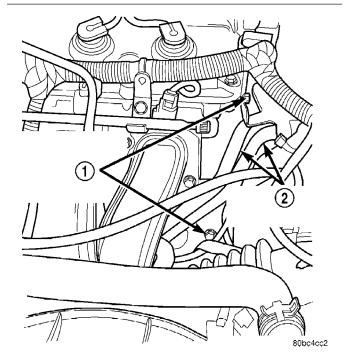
HEATER CORE COOLANT SUPPLY LINES
